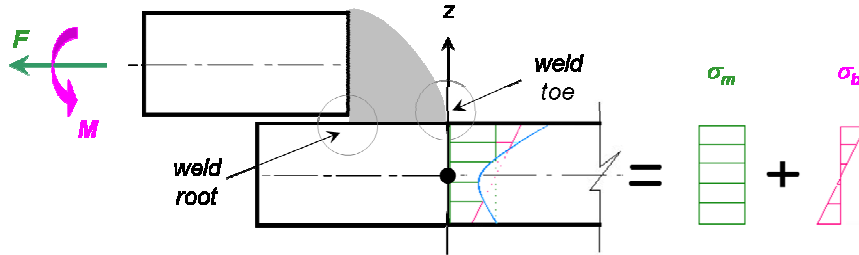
Plate lap fillet weld or overlap. Applied load (left side) and weld toe stress decomposition (right side).
